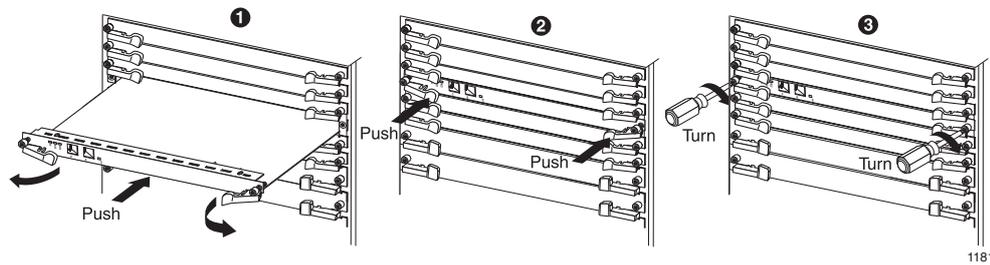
Replacing a Card in the SmartEdge 600 Chassis
